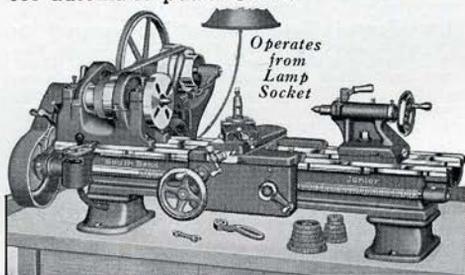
Cat. No. 422-YN, 9"x3' Horizontal Motor Drive Bench Lathe, less bench. . \$227.00
